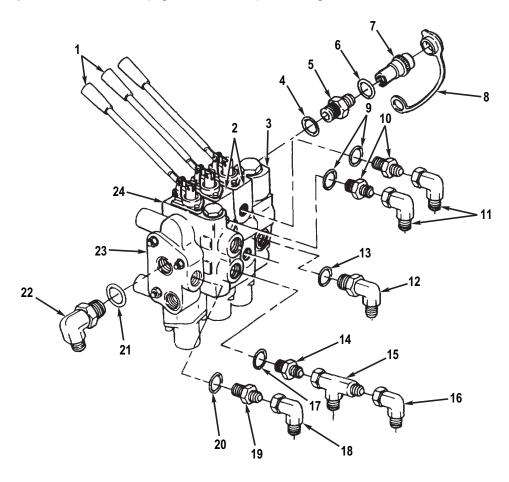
Hydraulic Control Valve (Rear Dolly) Fittings Installation.
